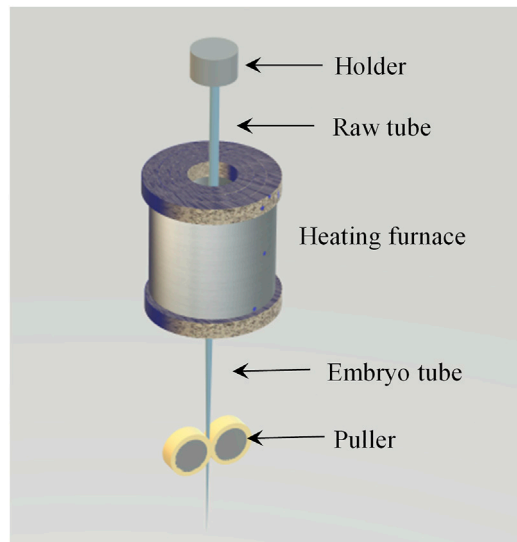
| Schematic diagram of the MXRL drawing using an optical fiber drawing machine.
